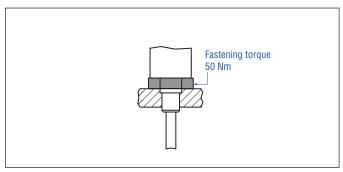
Mounting example of threaded flange »M«, »S« or pressure rod HD/HL/HP
